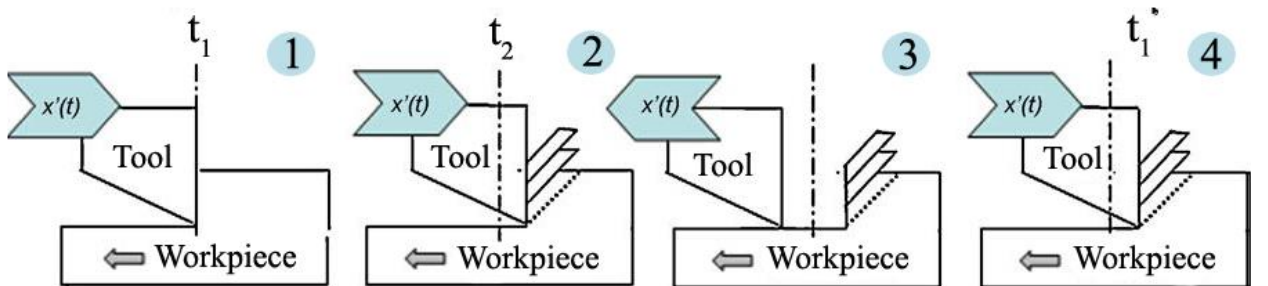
Machining in 1-D vibration assisted machining[13]
